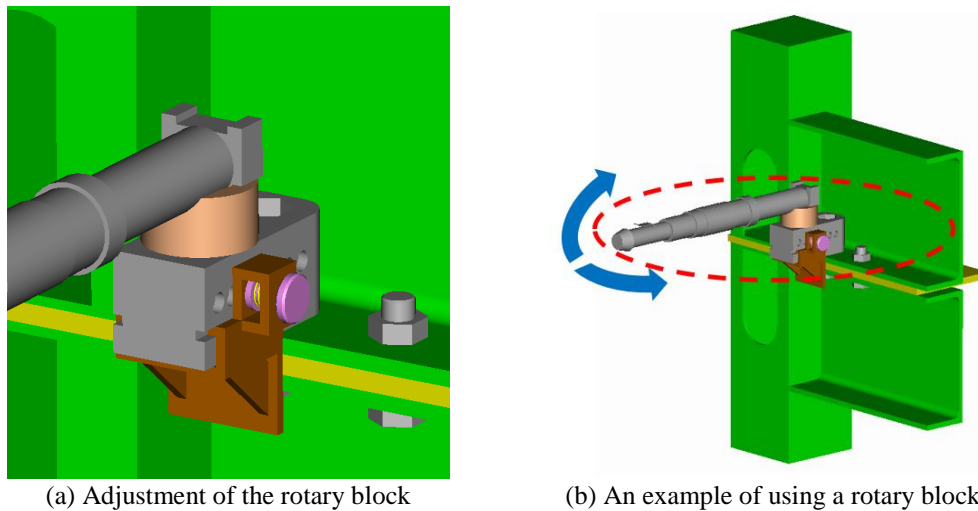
Adjustment of the Assembly Tool and an Example of Using a Rotary Block
